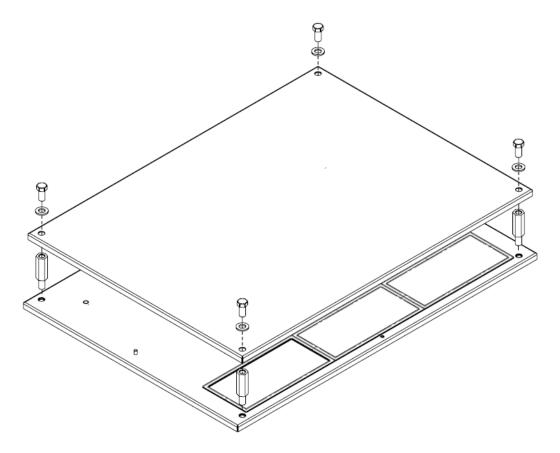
Active Filter IP22 (UL Type 1) roof installation
